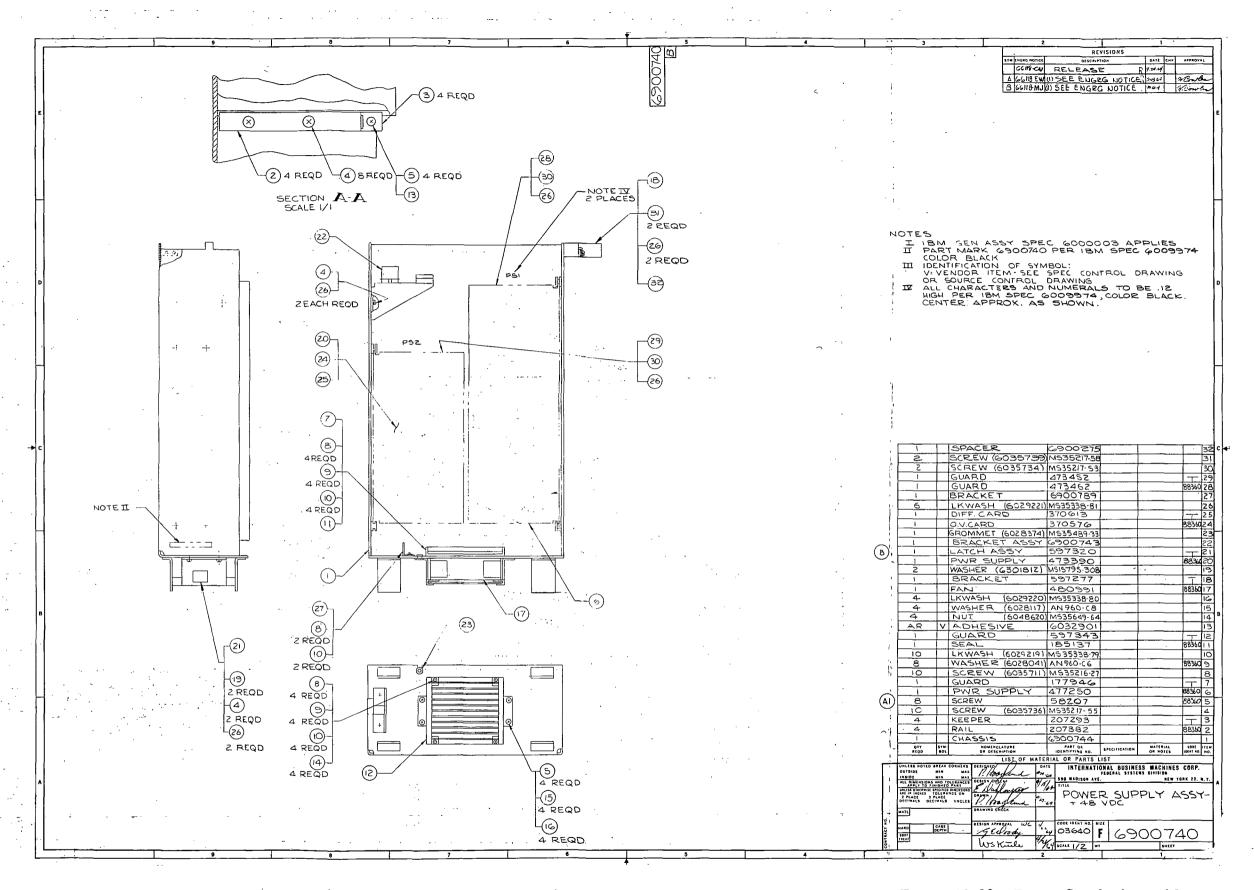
Power Supply Assembly (01B4) Assembly Drawing
